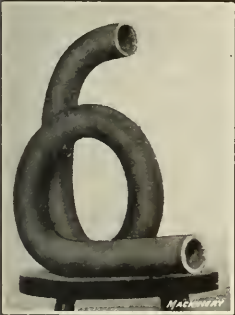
Bent Tube for cooling Open-hearth Furnace Door
